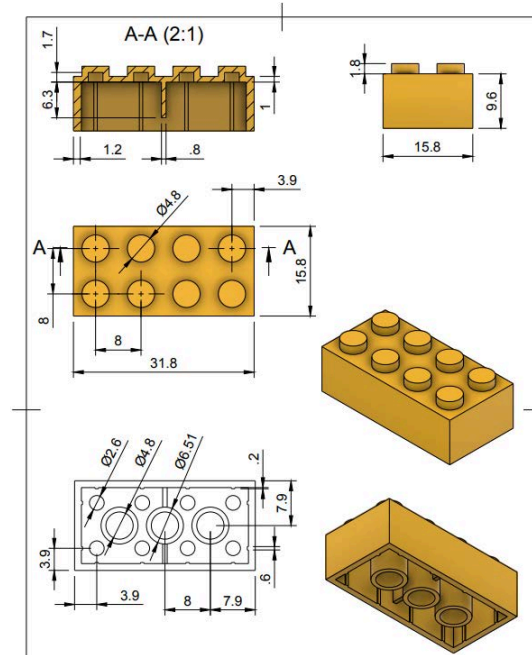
Dimensions of Lego Brick Design (*All dimensions are in mm)
